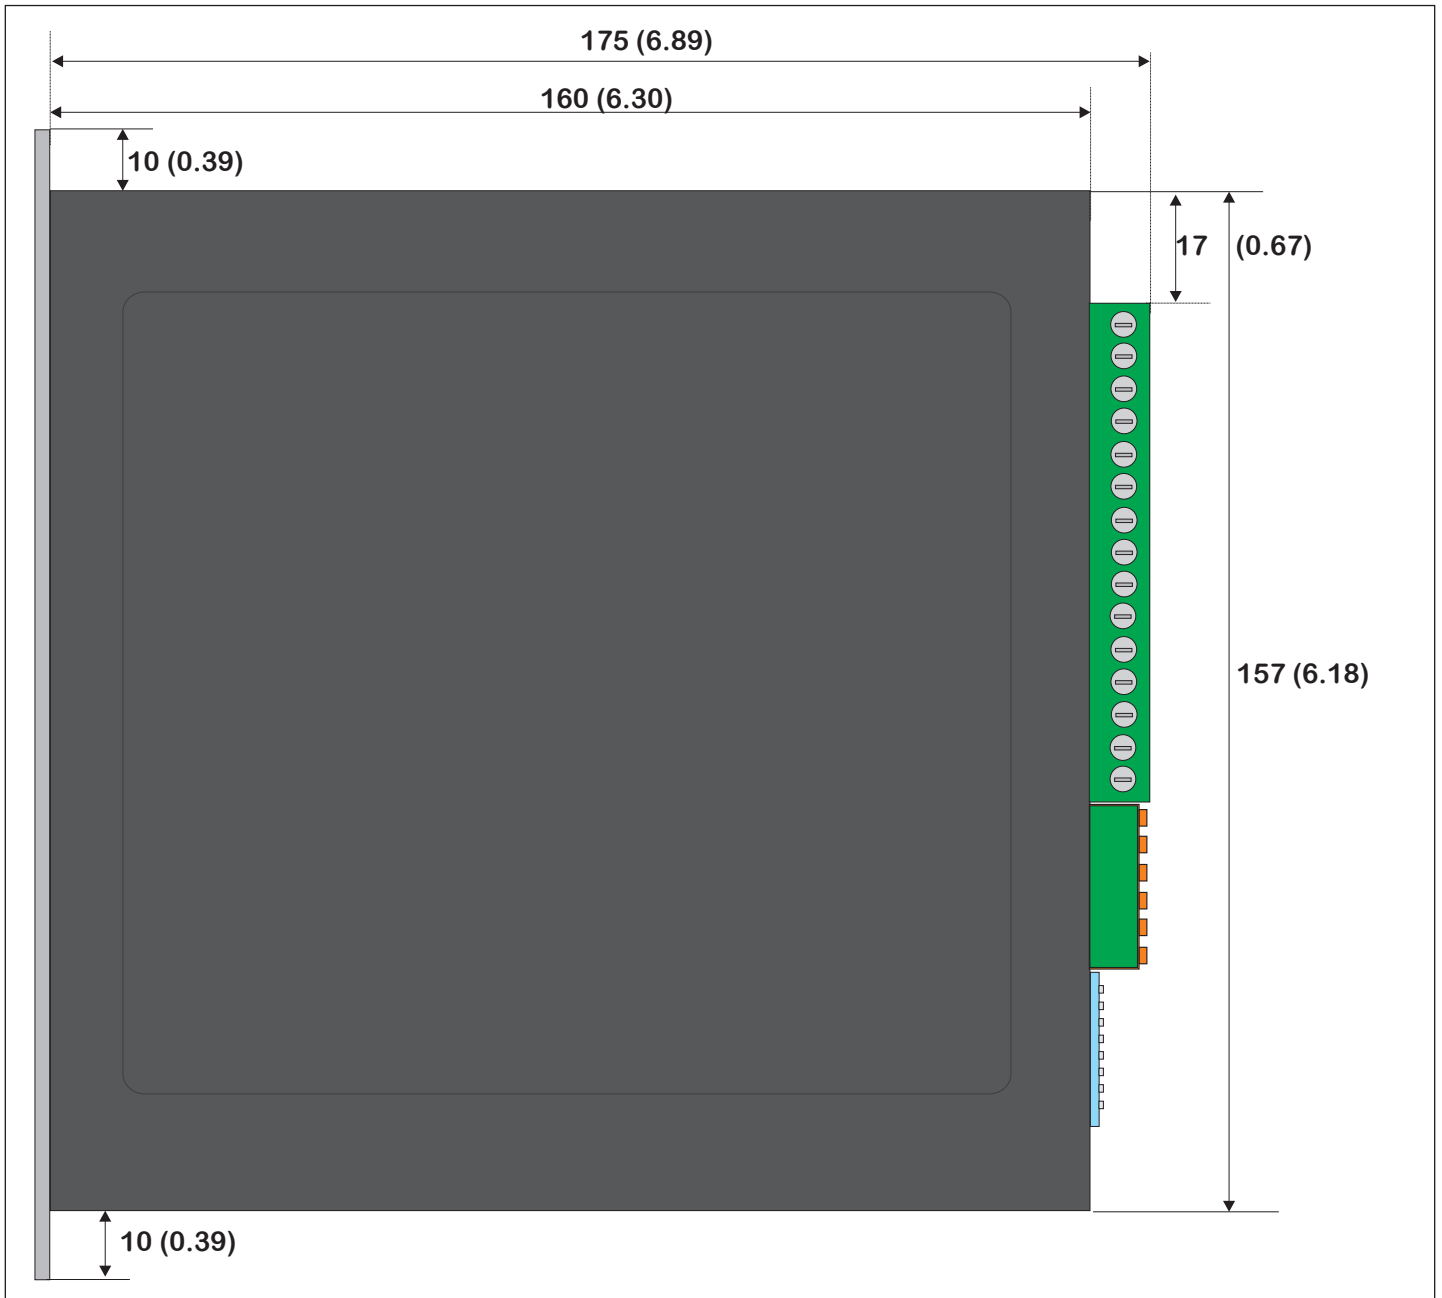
EAFR-101C dimensions in millimeters (in.) (side view).
